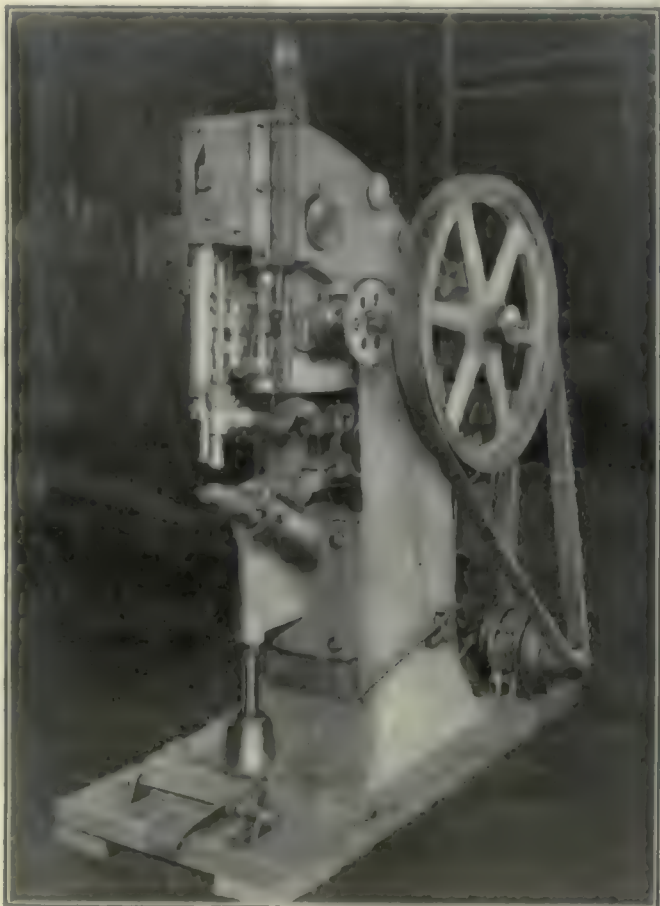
ROBERT TYPE-NB DUAL-HEAD ELECTRIC RIVETING MACHINE
